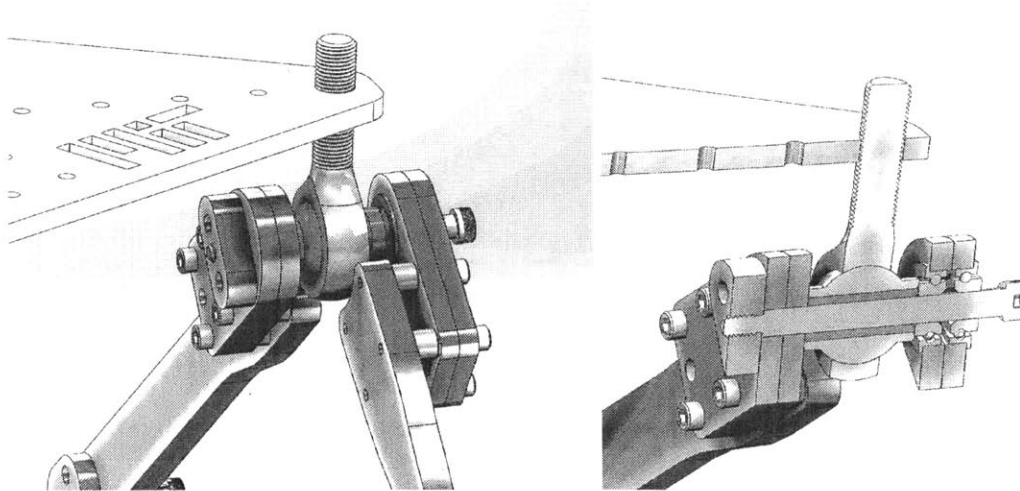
Regular and Section view of the Ball joint interfacing the top of each scissor mechanism with each apex of the top platform.
